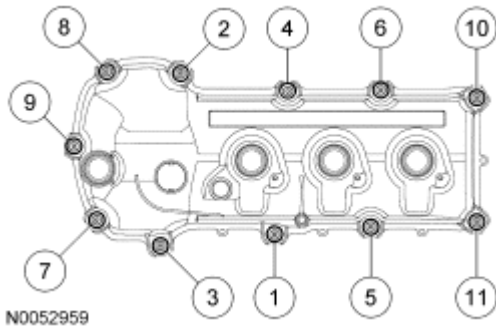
Installing LH Valve Cover Stud Bolts In Sequence
